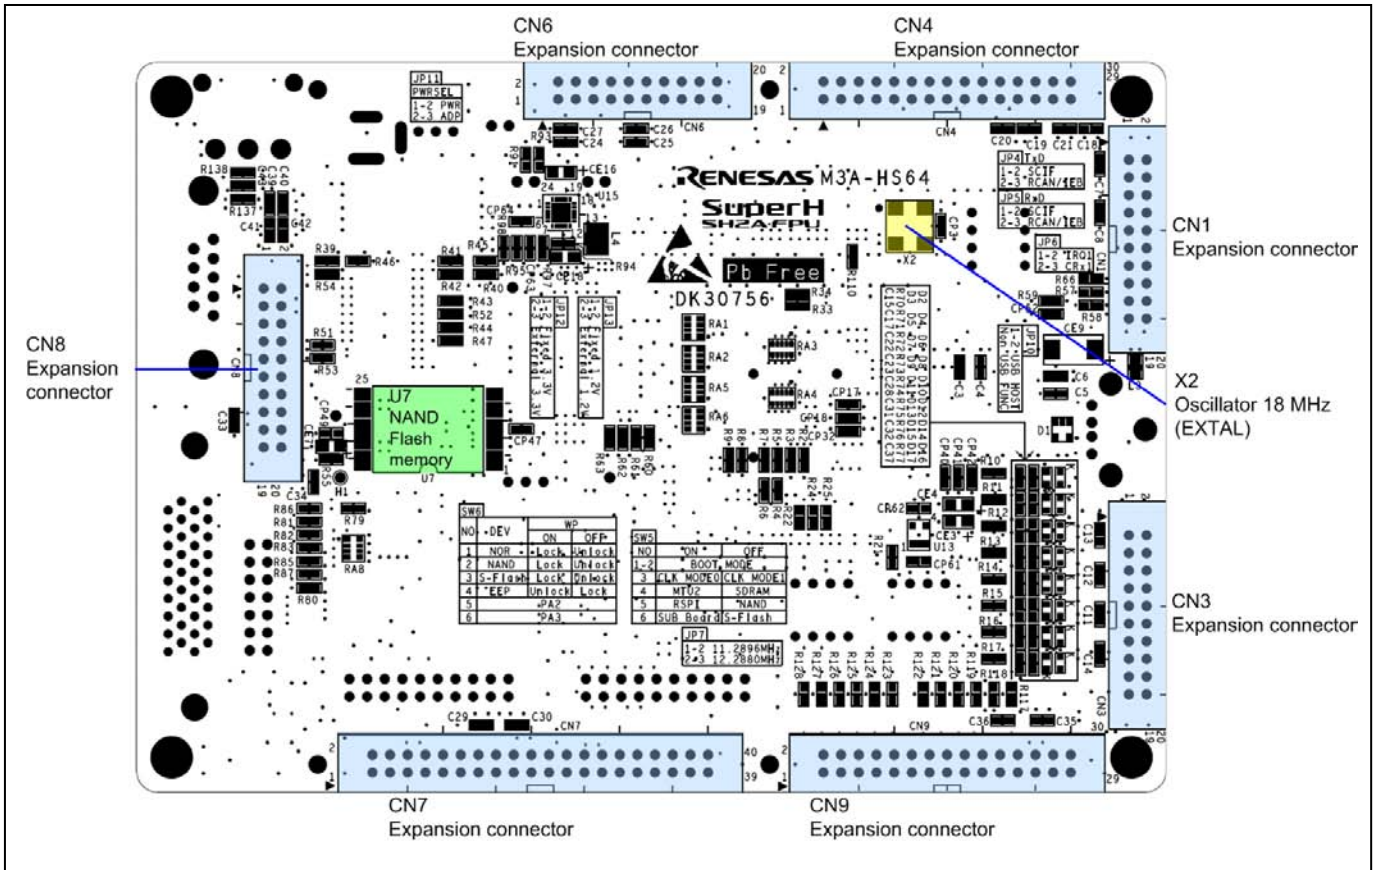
M3A-HS64 Layout and Component Placement (Top View of the Solder Side)
